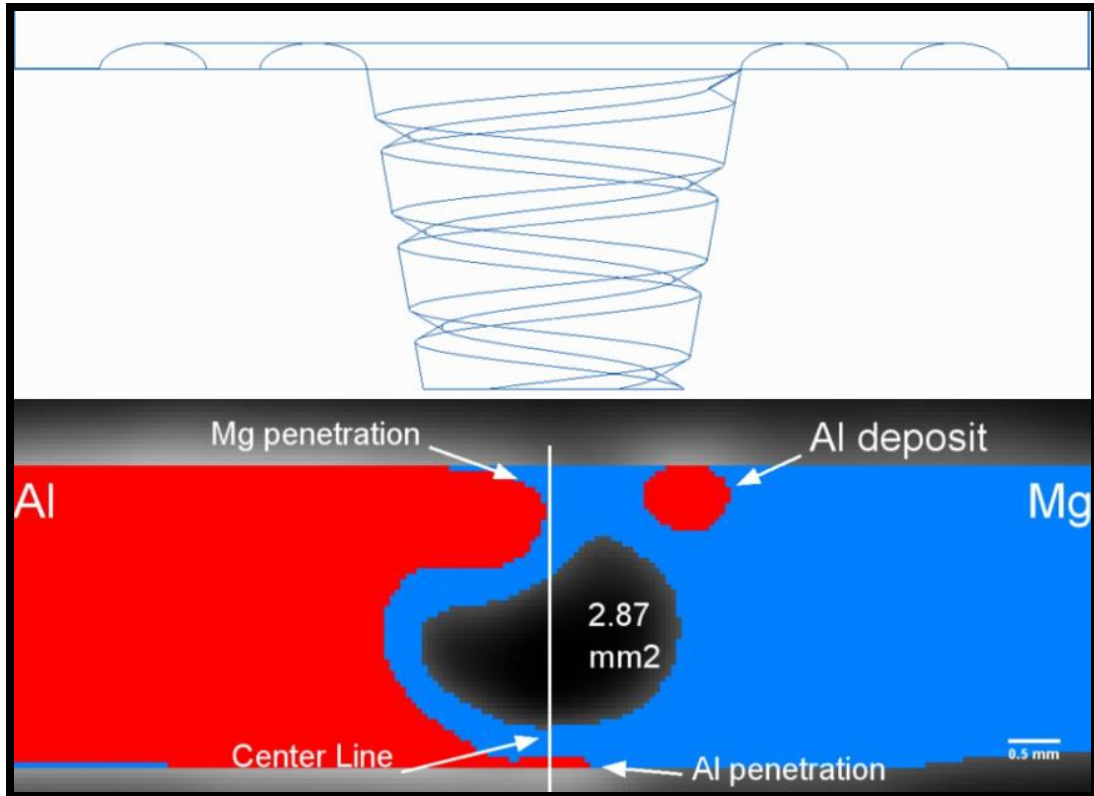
Zoomed-in view of reconstructed cross-section A-A (bottom), the centerline of the weld is marked with a vertical white line. The material mixing is indicated with arrows; the defect area is shown, (top) outline of the tool used for sample (e) shown at the same scale.
